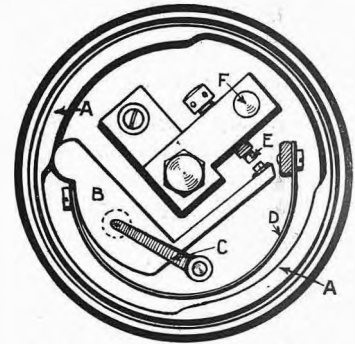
Sketch of the K.E.W. low tension contact maker.
